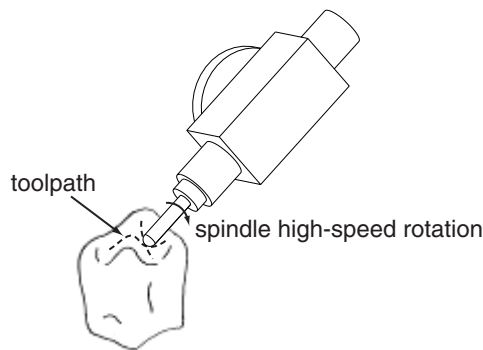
A high speed spindle traverses toolpaths on the complex occlusal surface of a dental restoration.
